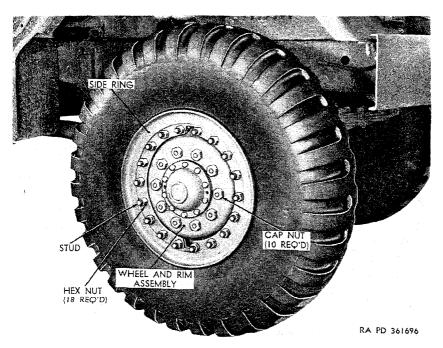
Wheel and tire assembly with bolted-on-type side ring (14:00 \times 20 tires)
